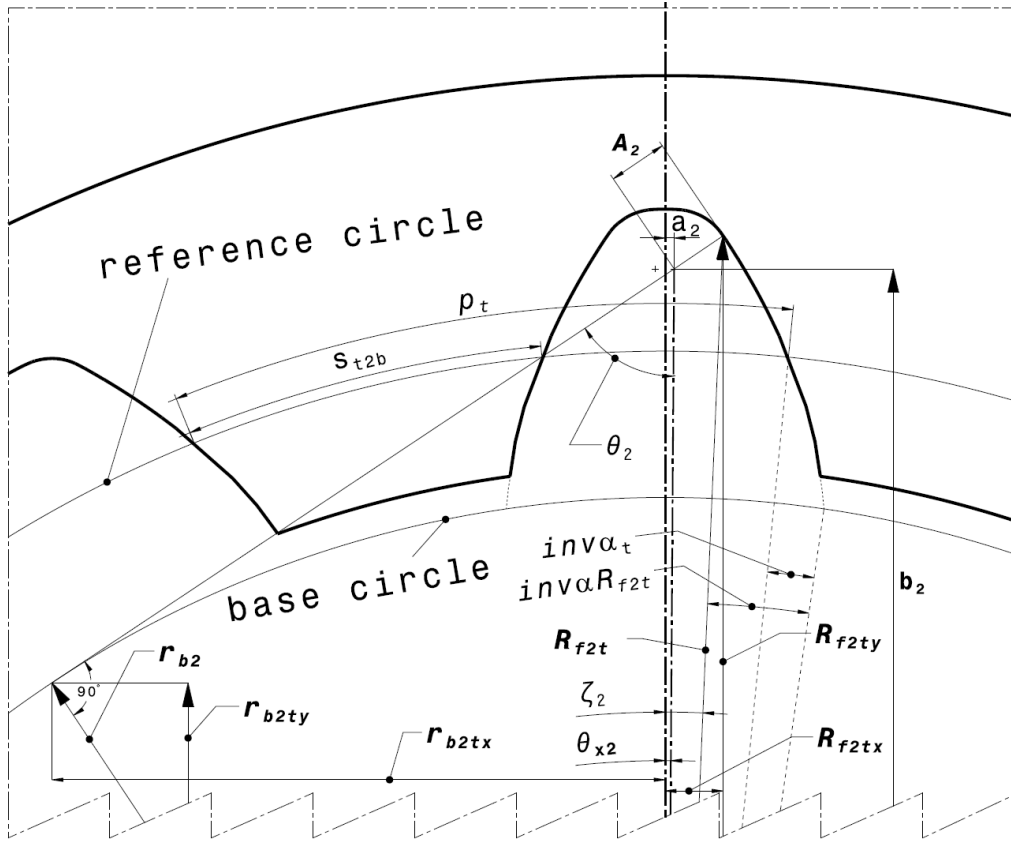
Transverse plane view of internal gear pair gear tooth
